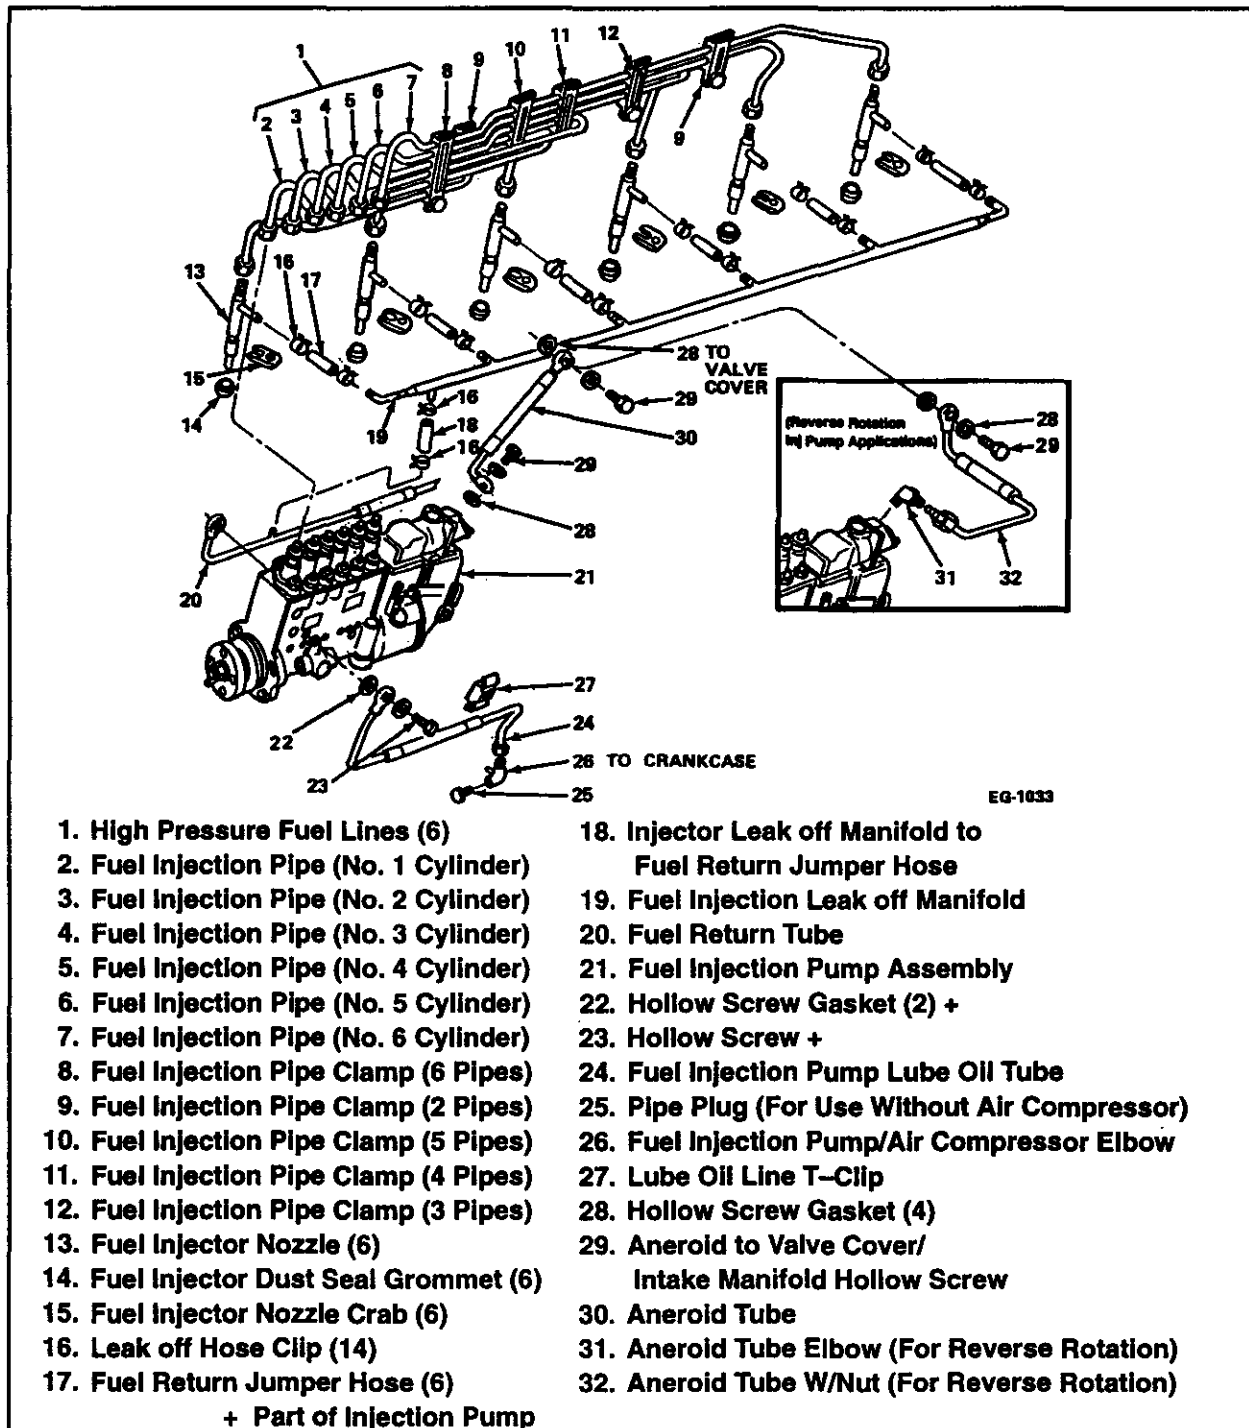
Fuel Injection Pump, Piping, Nozzles, Drive and Fuel Filter Header.
